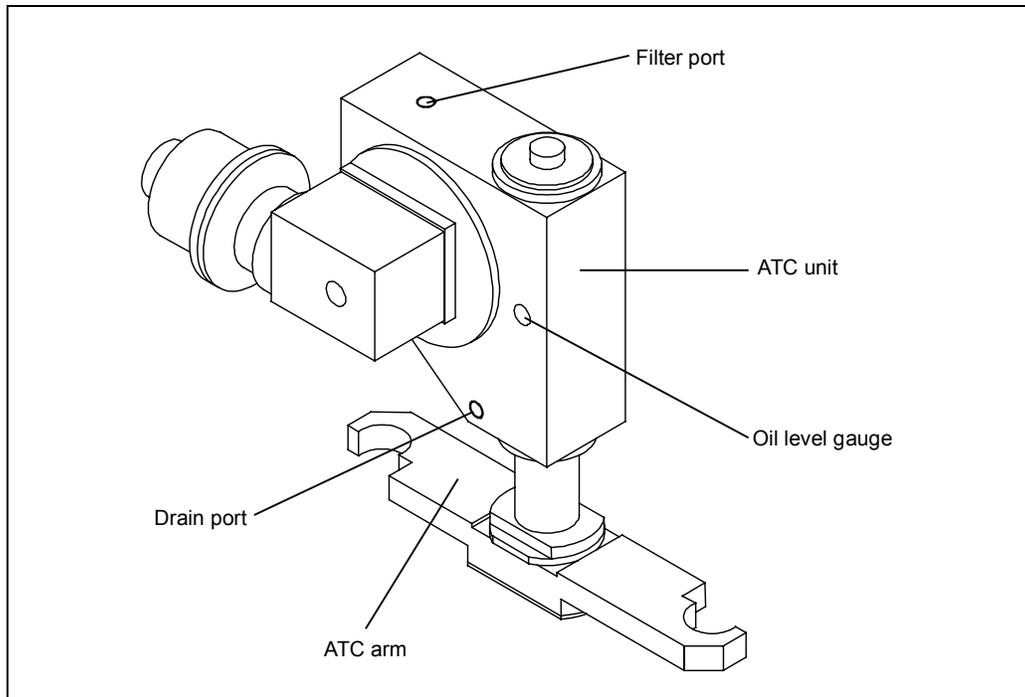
Changing the Hydraulic Oil of ATC Unit
